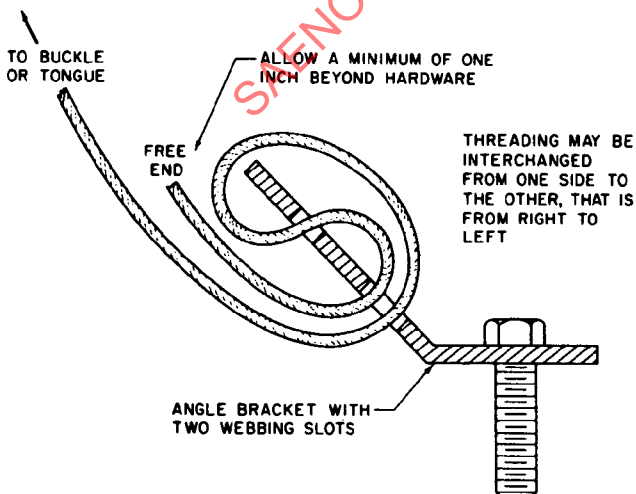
SAME THREADING IS USED FOR TWO-SLOT SISTER HOOKS OR TWIN HOOKS, TWO PARTS BEING HELD TOGETHER BY WEBBING AS THOUGH THEY ARE SINGLE UNIT
